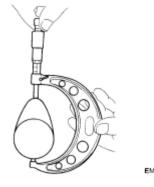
Measuring Camshaft Cam Height Using Micrometer (EXH) Courtesy of NISSAN MOTOR CO., U.S.A.
